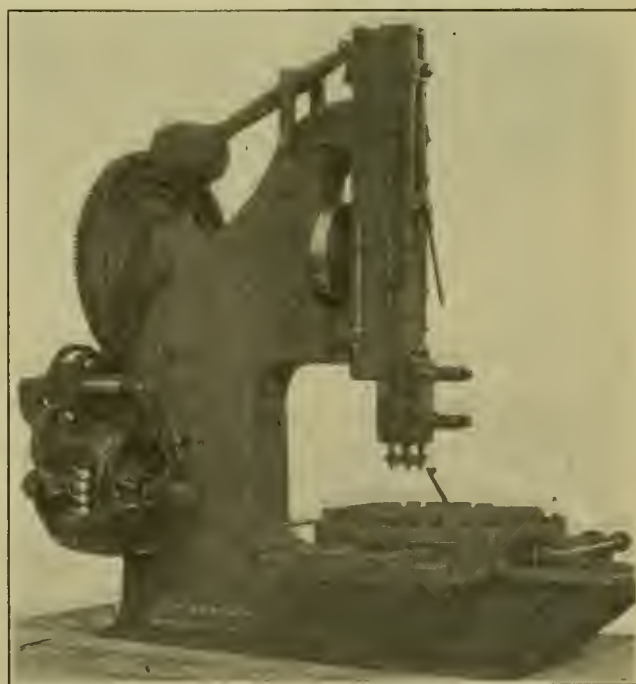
GEARED VARIABLE-SPEED MOTOR-DRIVE UPON A LARGE SLOTTING.—BETTS MACHINE COMPANY.
